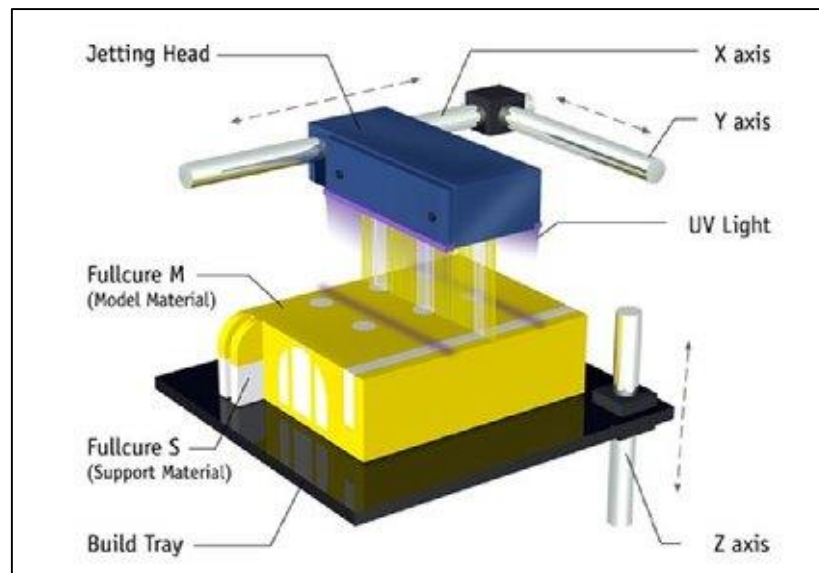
Illustration of the Inner Part of Thermojet 3D Printer
